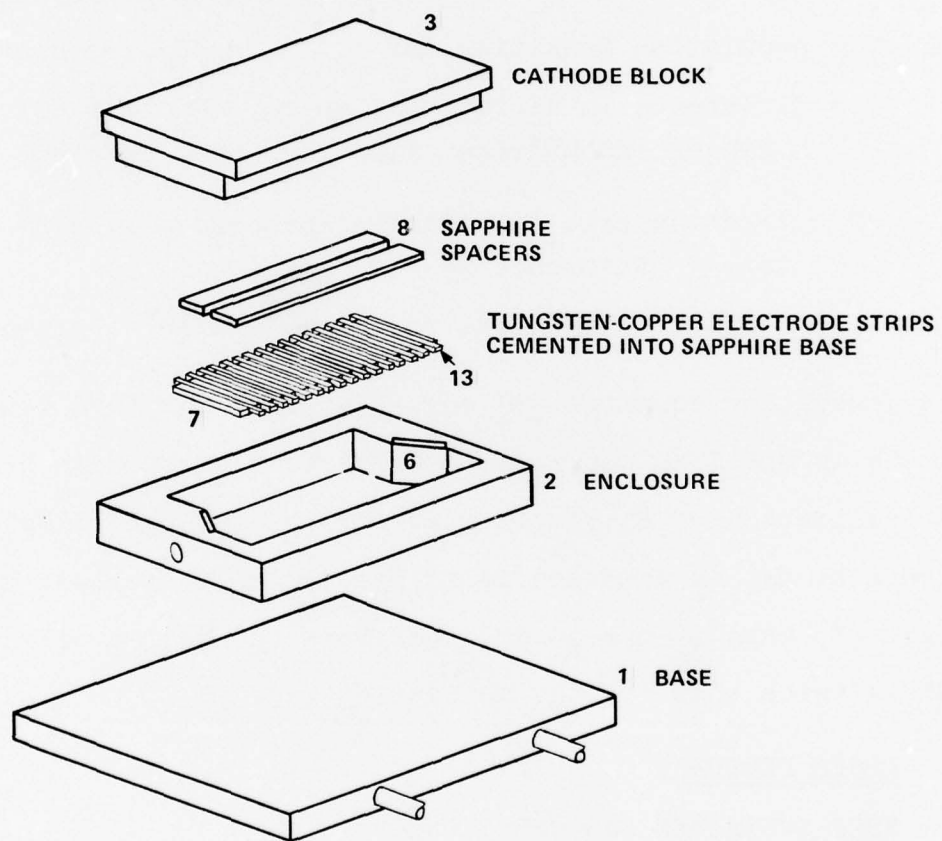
Self-Sustained Discharge Unit - Exploded View.
